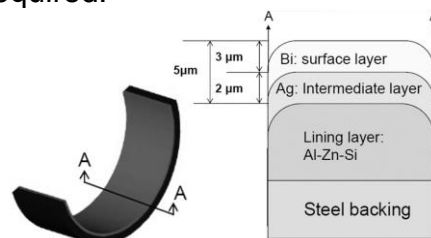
Engine bearing model and schematic diagram of bearing cross section
